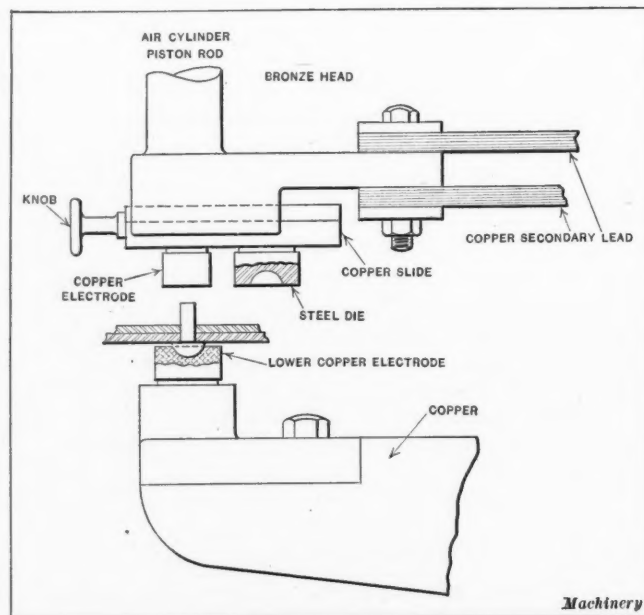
Method of upsetting Rivets over $\frac{3}{8}$ Inch Diameter, using Copper Electrodes for heating and Steel Die for upsetting
